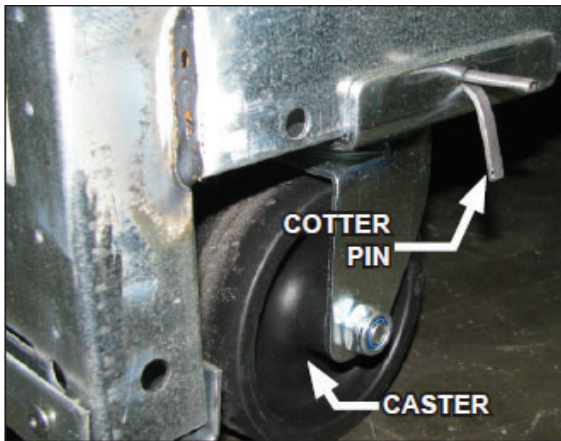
Removing the casters is an easy process. Simply flatten and remove the cotter pins that are holding the casters in place. Then lift the case with a "J" bar and slide the caster assemblies out. The dismantled casters can now be discarded.
